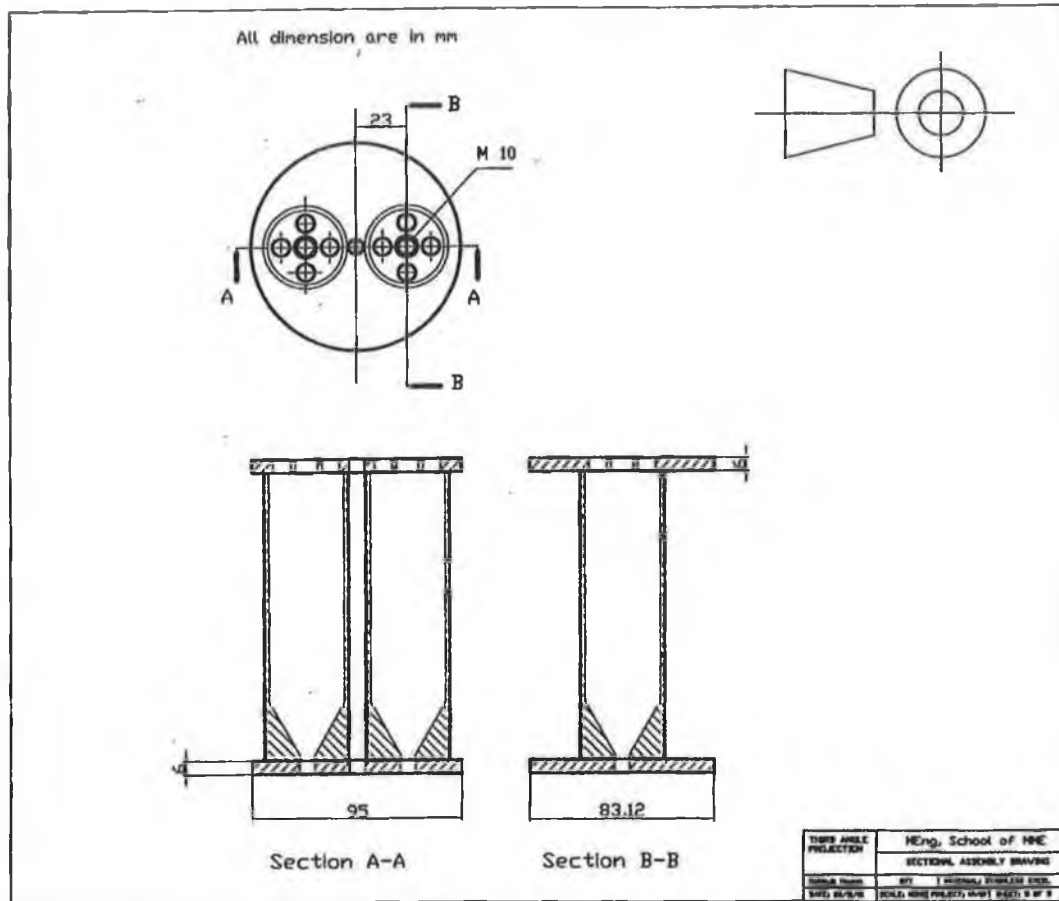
Sectional assembly drawing of the base plate, the top plate and the individual powder holders.
